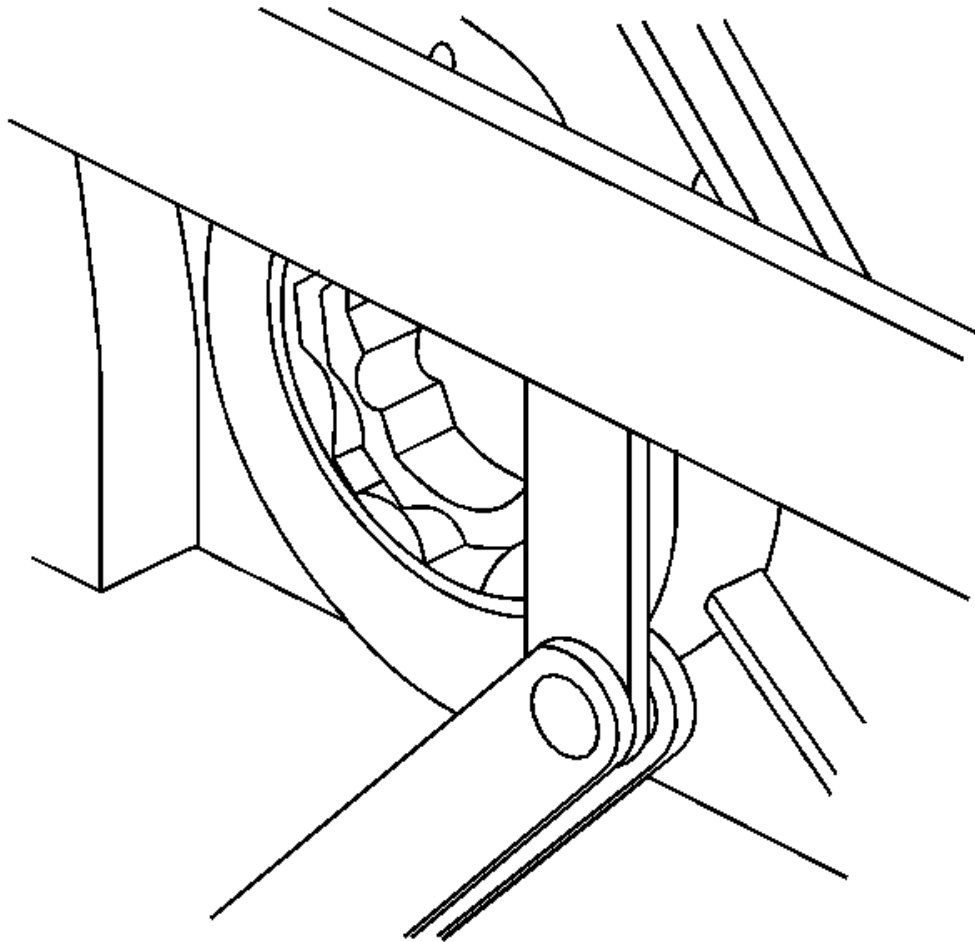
Measuring Engine Oil Pump Axial Clearance Of Rotors
